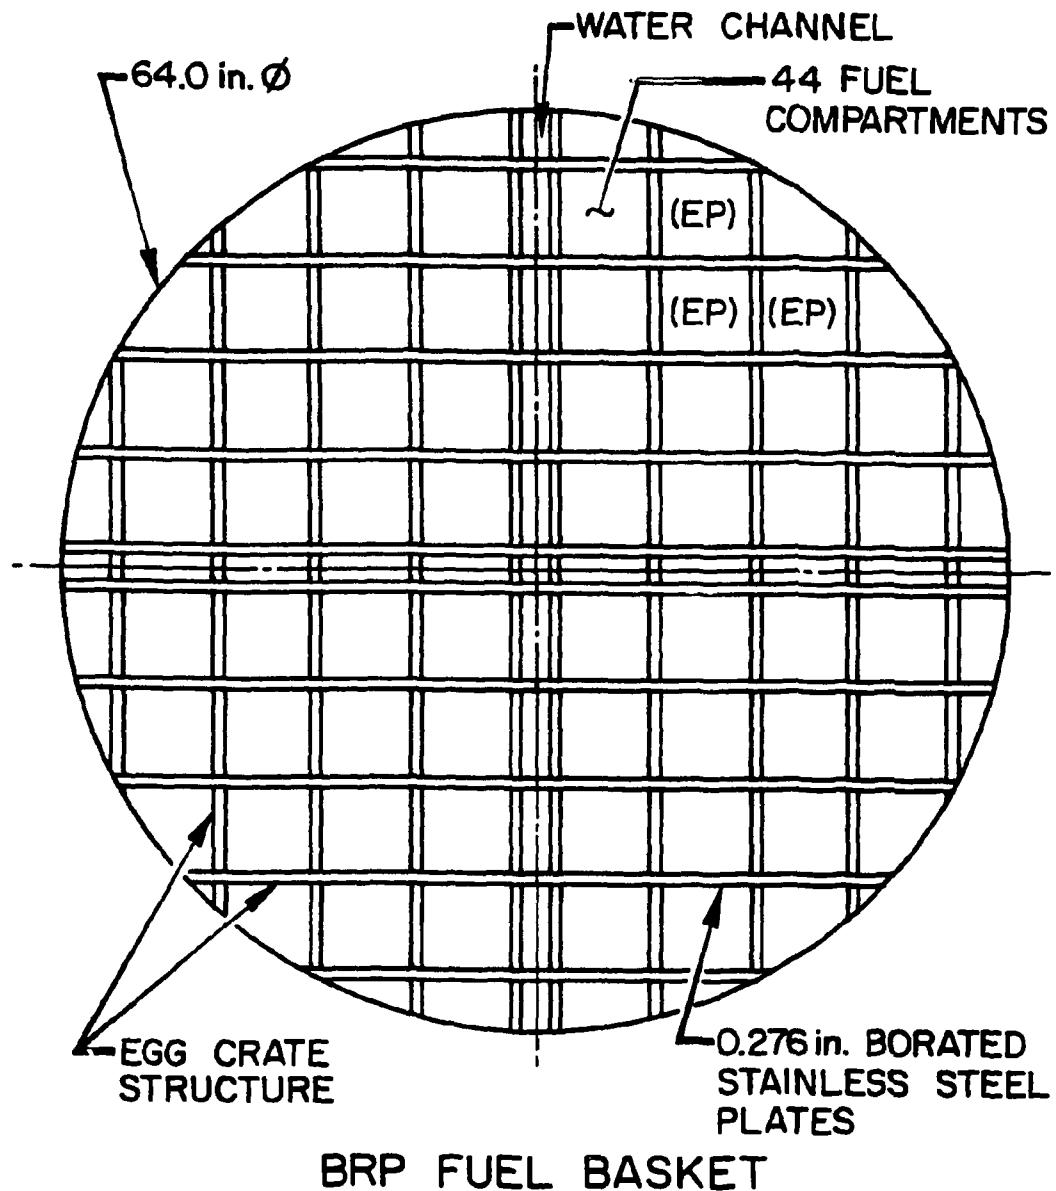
Location of EP fuel assemblies for case BRP7 loading.
